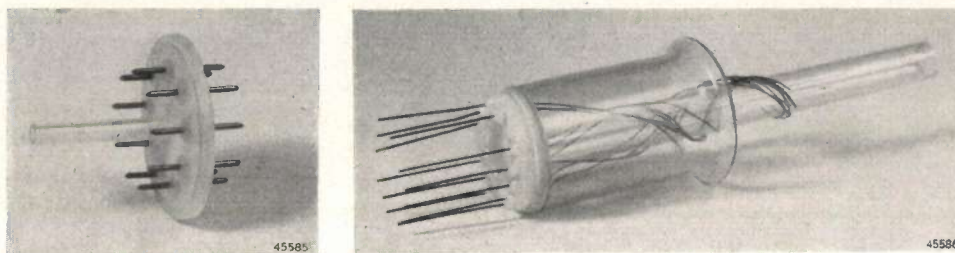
Exhaust tubes can be welded in simultaneously with the fusing of the lamp or valve base.
